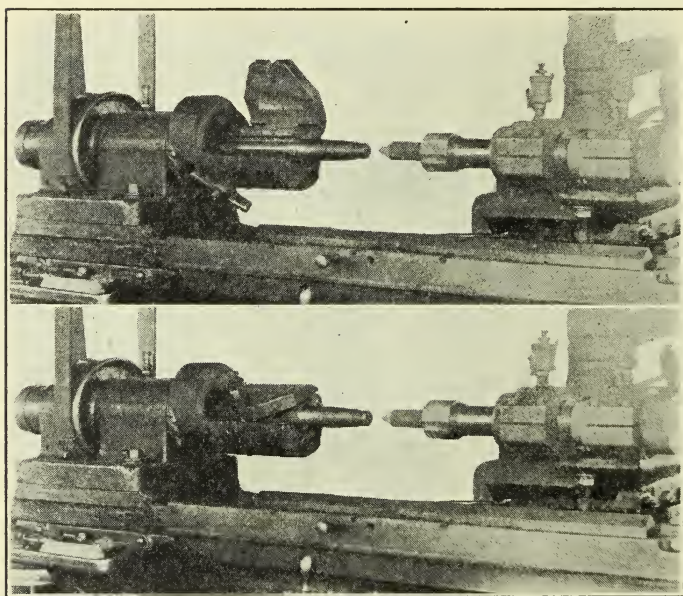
GRINDING THE CENTERS IN THE SHAFT AFTER THE SPLINES HAVE BEEN FORMED
